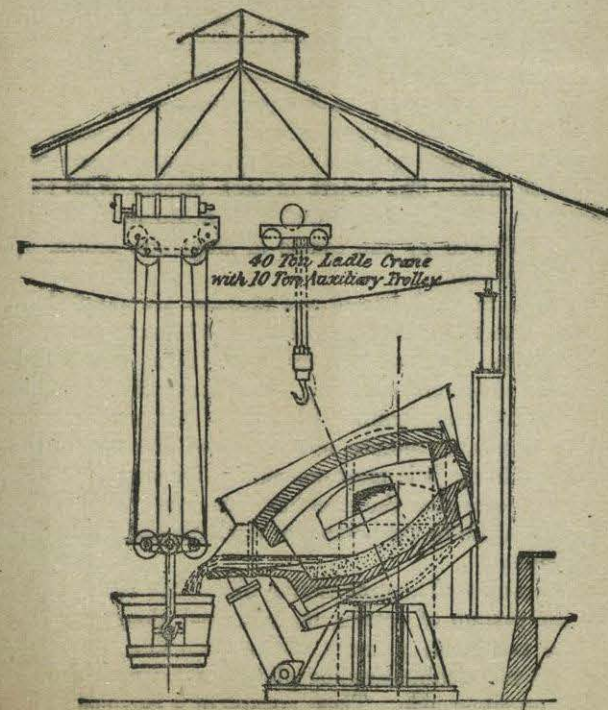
Wellman Furnace, with Casting Ladle carried on Overhead Ladle Crane.
